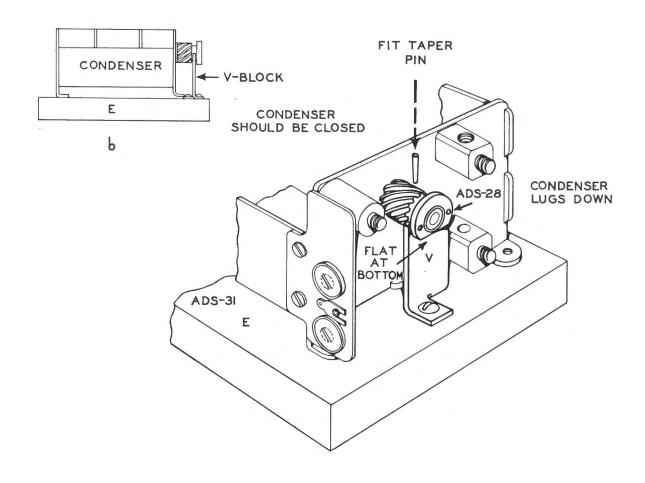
Condenser — Mounting of Spiral Gear ARA or AN/ARC-5 Receiver
